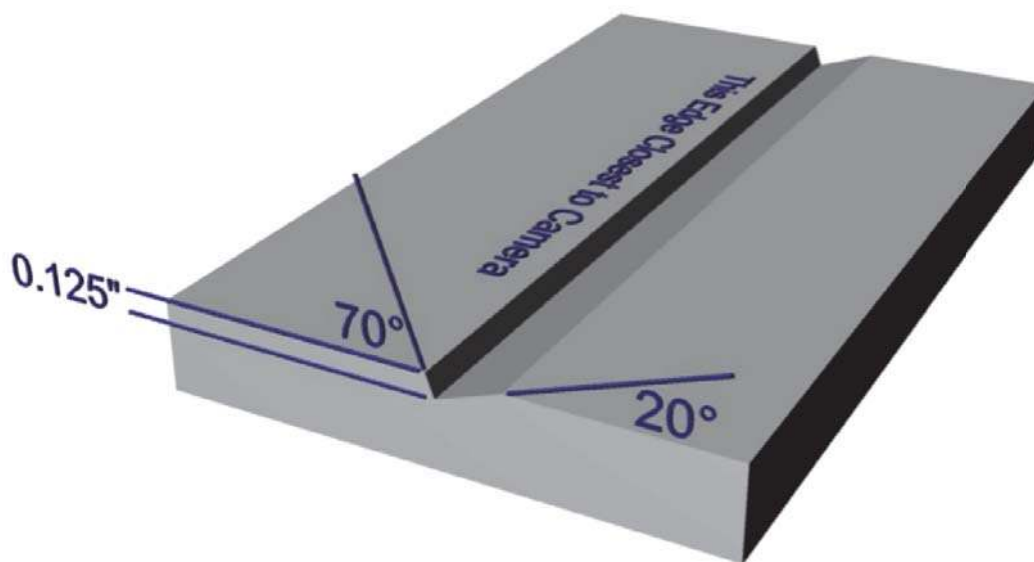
Drawing showing the the axial beam dump groove cut into the surface to prevent the scattering of the PIV laser light.
